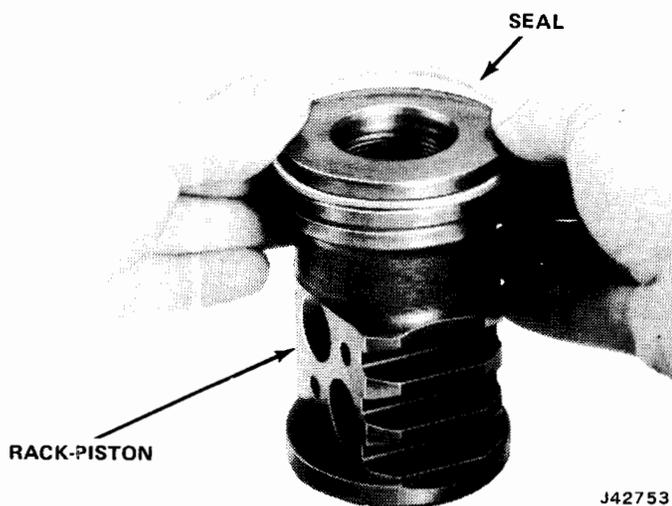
Assembling Seal Ring on Rack-Piston Nut
